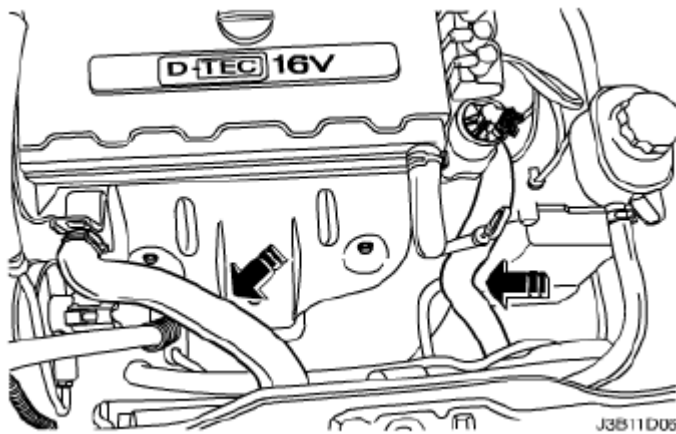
Identifying Lower Radiator Hose To Coolant Pipe
